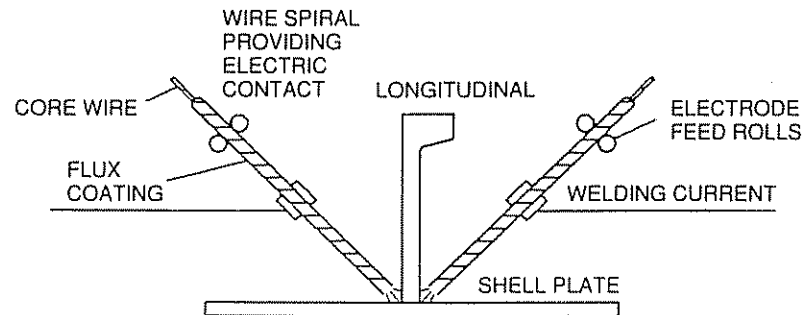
Automatic shielded metal arc welding.
